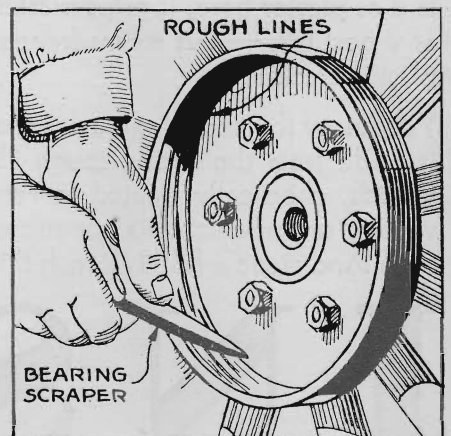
Tool's marks on braking surface of drum cause pounding. Polishing ends it.
